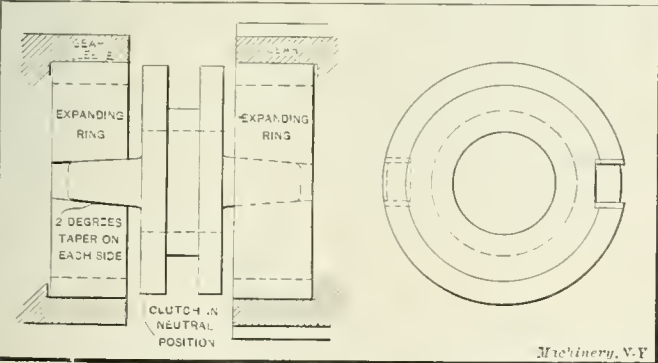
Principle of Action of Clutch used in Mueller Gear-box
